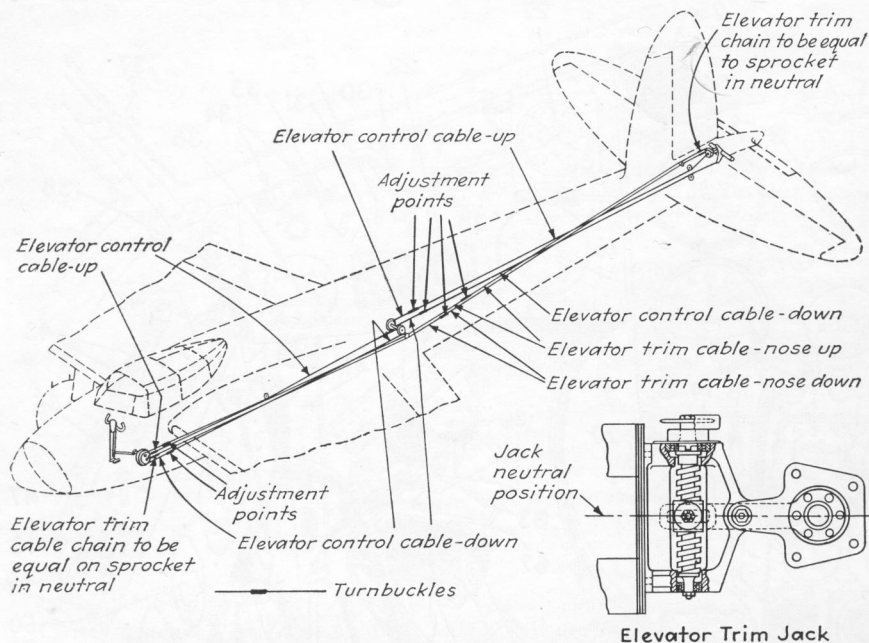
Elevator controls with a detail of the trim jack. Trim cables run to the jack, but others run to the intermediate shaft of bulkhead 4.
